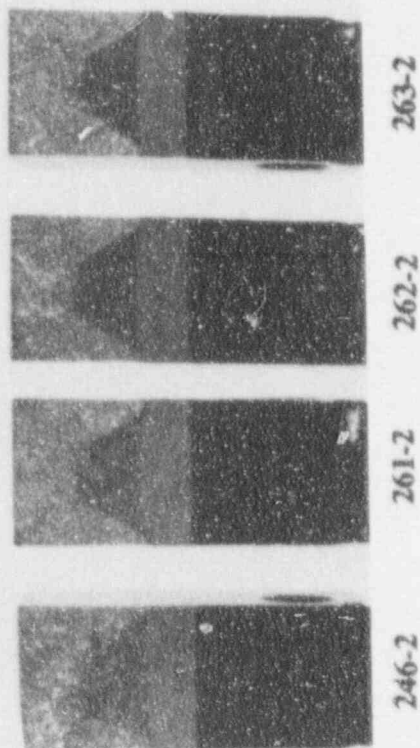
FRACTURE SURFACES OF J_{1C} SPECIMENS FROM 10-in. AND 8-in. SWING ARMS
